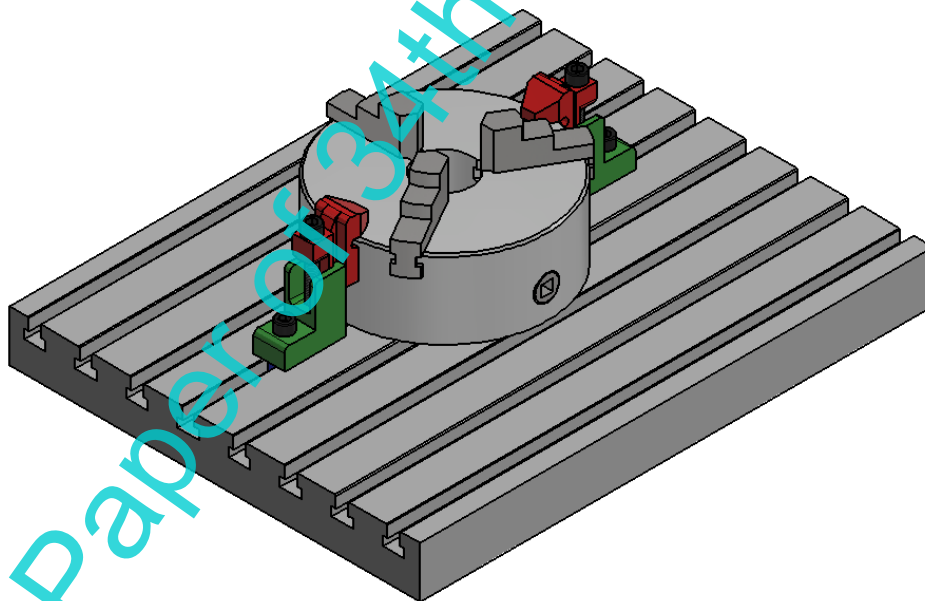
Model of the adjustable jig with chuck for tighter clamping
